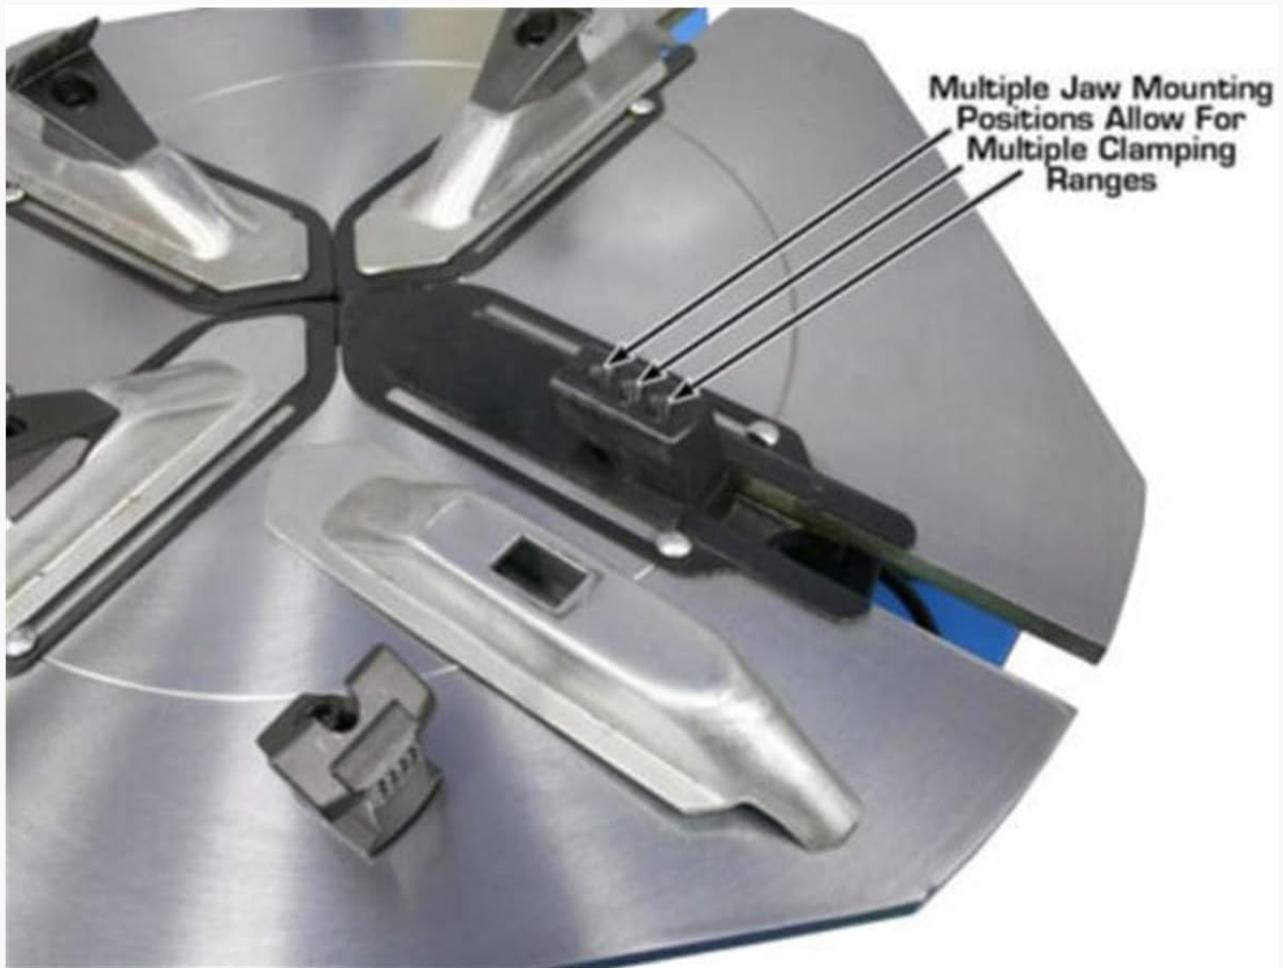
Detail of the jaw assembly, illustrating multiple jaw mounting positions that allow for various clamping ranges to accommodate different wheel sizes.
